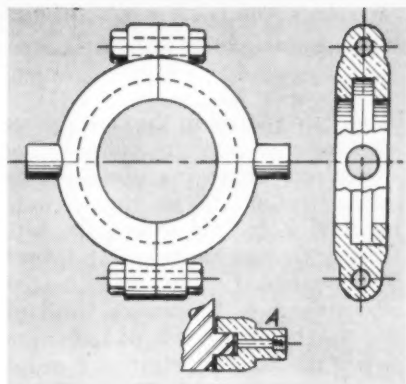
In this shifting collar, a bronze casting is used which is split in half before machining. The halves are held together with the aid of two hexagon head bolts and nuts. The bore is finished to fit the single flange of the shifting member shown in the partial section view located below the main view.
